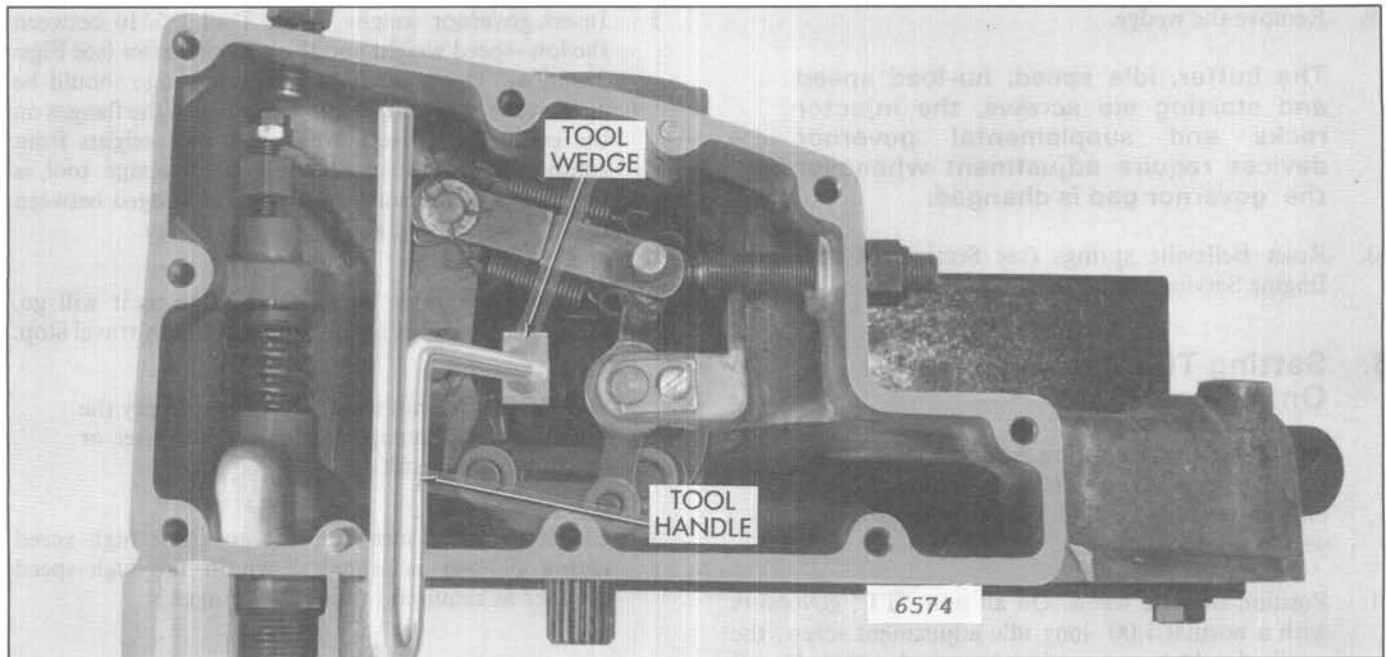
Tool J35516 Inserted Between Low Speed Weight and Riser
